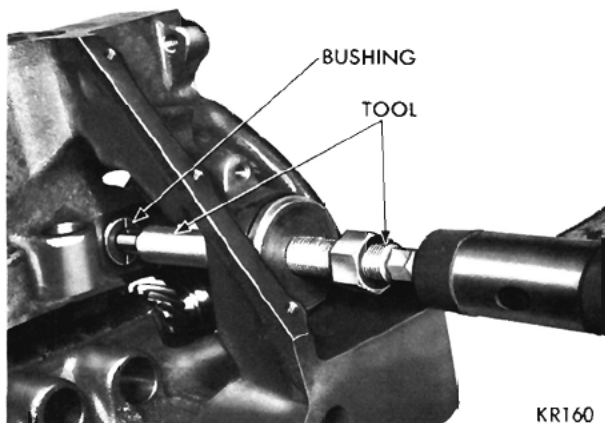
Installing Distributor Drive Shaft Bushing Using Tool C-3053
